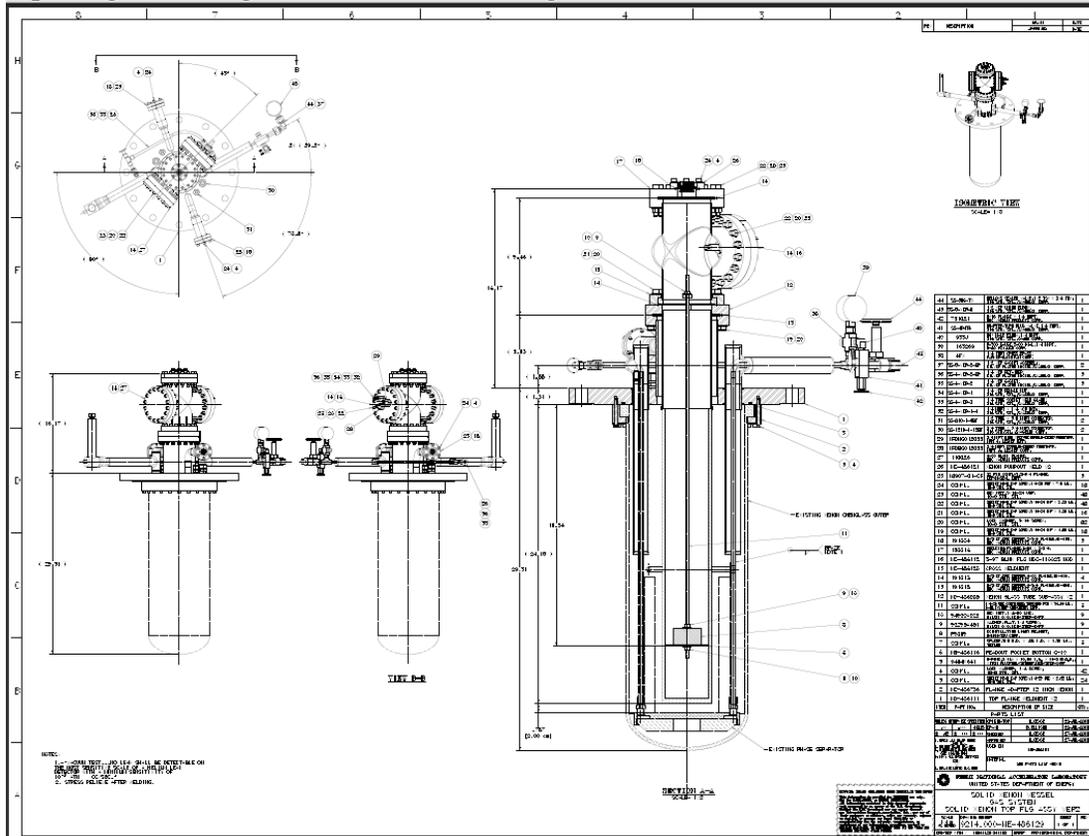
Drawing 486129, Solid Xenon top flange assembly
